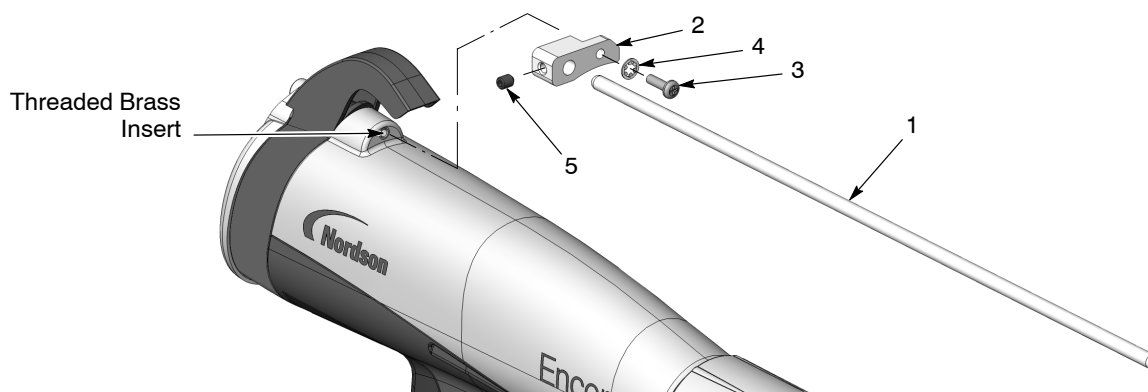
Installing the Ion Collector Kit on a Standard Spray Gun
